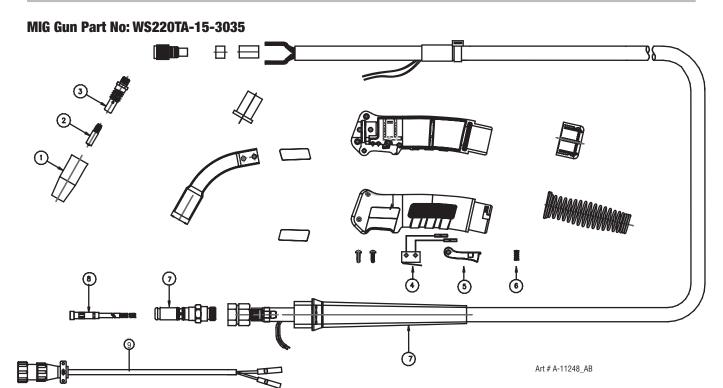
Tweco WeldSkill 220 MIG Gun
